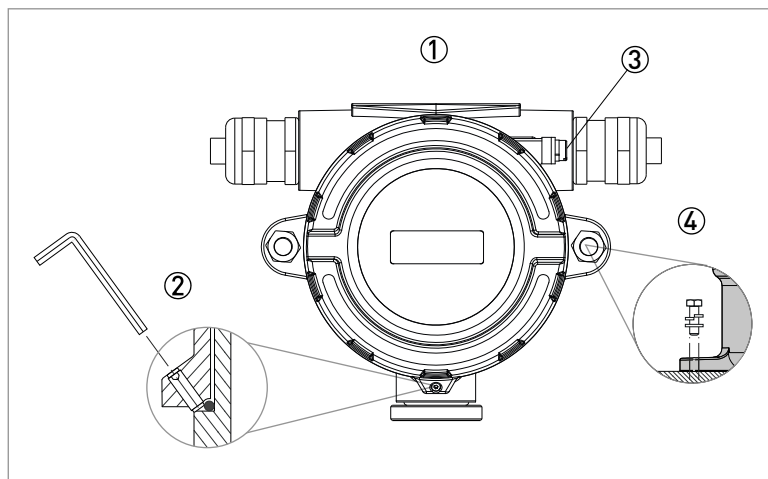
Wall mounted installation example with stainless steel TFA-100
